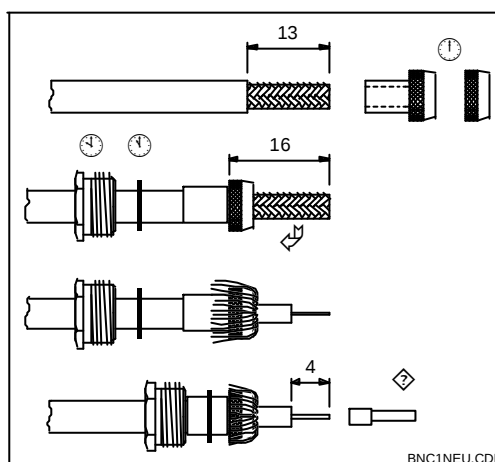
Termination of pH connecting line for installation of BNC elbow plug
